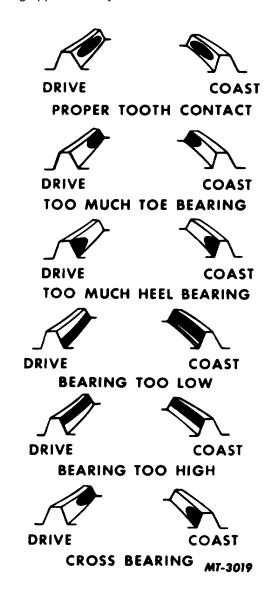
Location Size and Shape of Correct Tooth Contacts.
